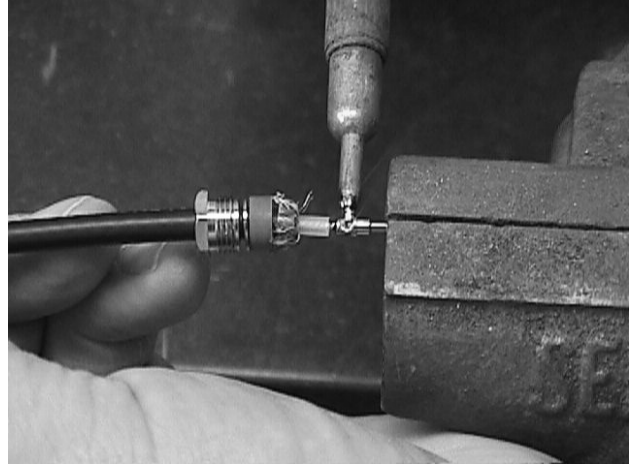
Soldering the center conductor inside the center pin. The solder in the center pin is melted first, then the cable end is pushed into the hole in the end of the pin.
